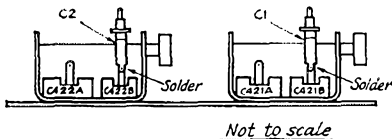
$C_1$  is soldered to the stator of  $C_{121B}$  and  $C_2$  is soldered to the stator of  $C_{122B}$ , so that the mounting flange of each trimmer clears the end supports of the variables and is the same height above the chassis.
